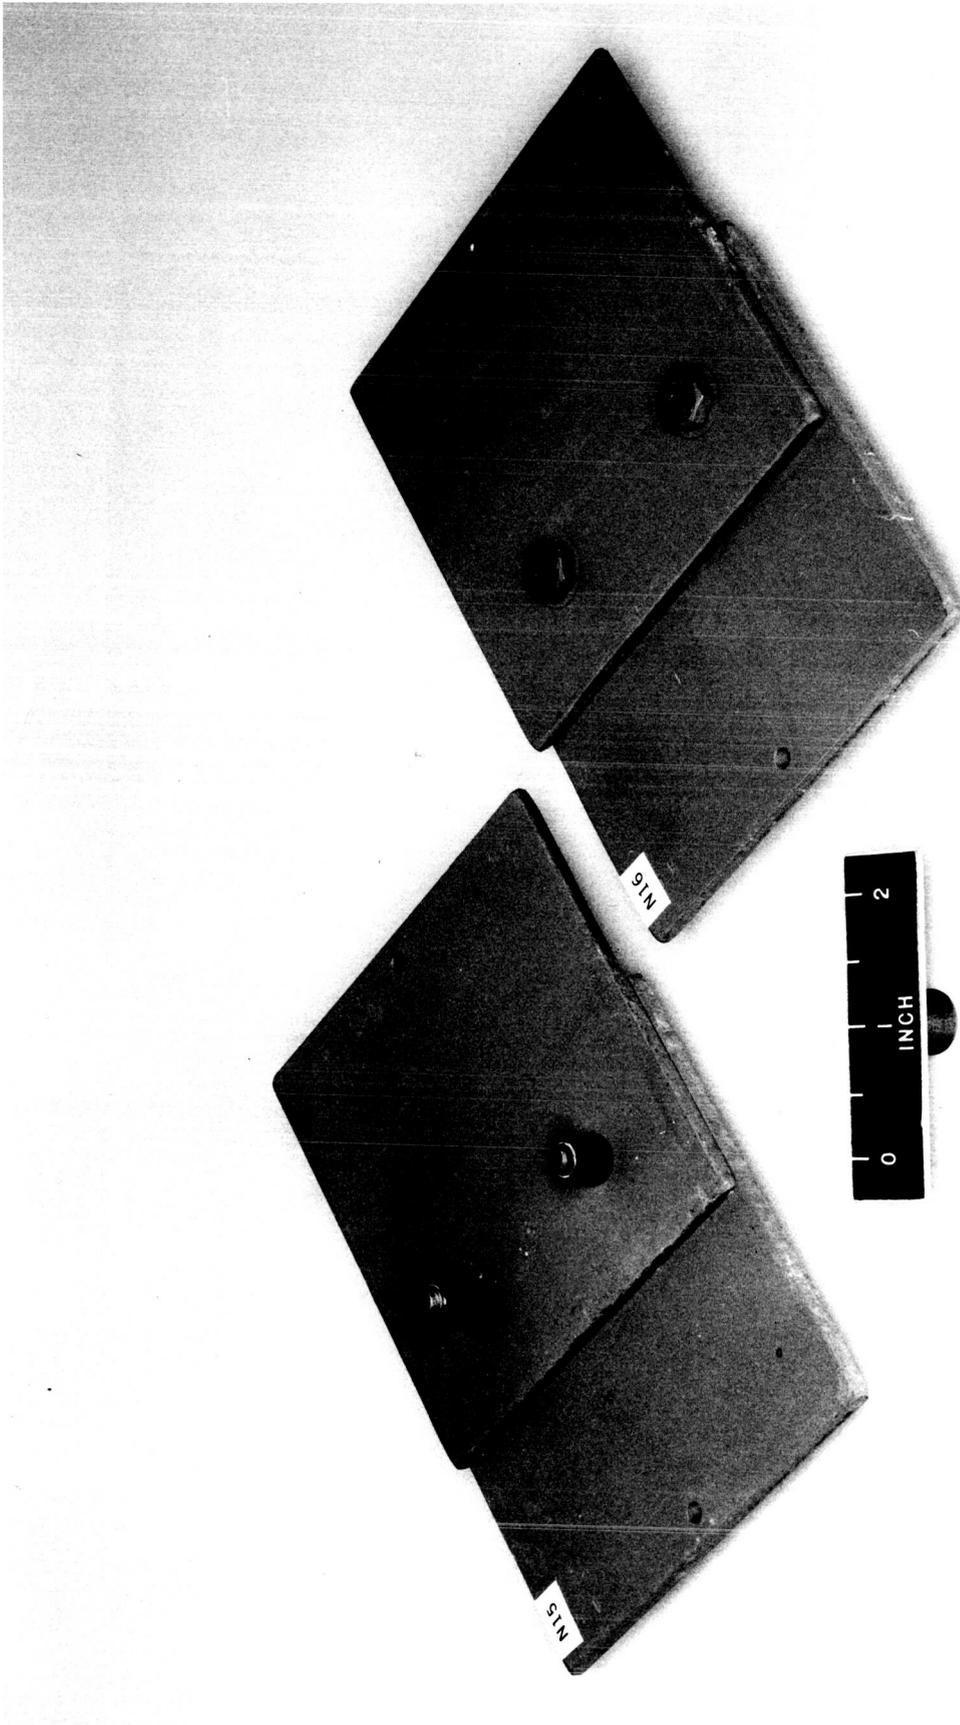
CORROSION ON ALUMINUM FASTENERS CONNECTING PAINTED 7075 ALUMINUM PANELS
